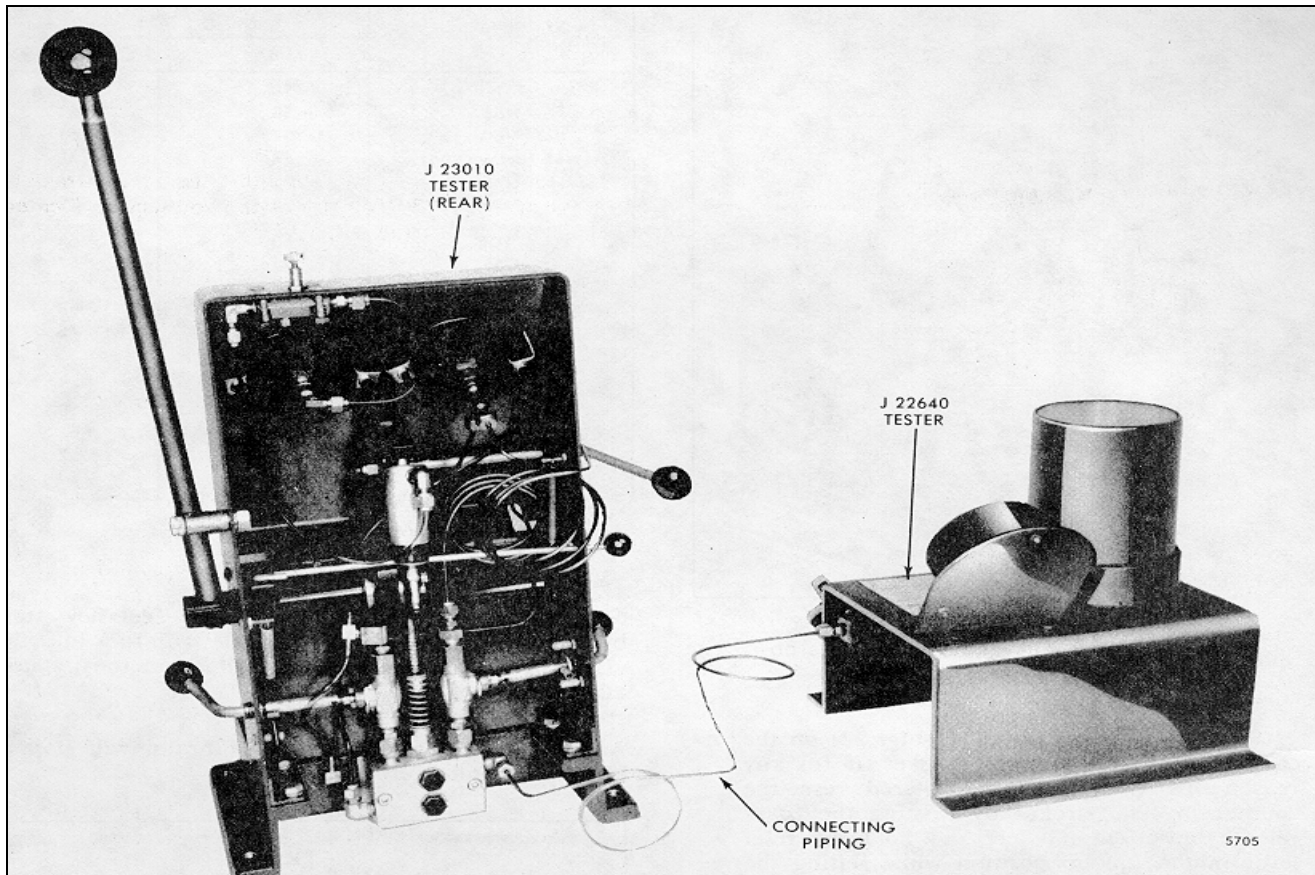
Injector Needle Valve Tester J 23010 with Auxiliary tester J 22640
